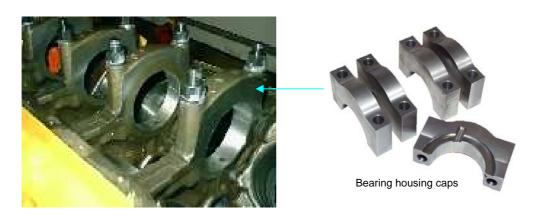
Main Bearing Housings in a Reciprocating Engine
